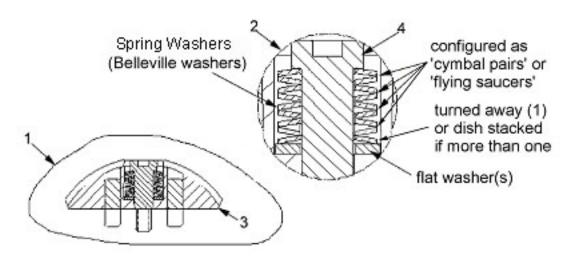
Some configuration of clutch spring stack. Each 'spring' stack contains multiple springs (Belleville washers) - arranged into three, four, or five 'flying saucers', or turned away against the flat washer(s). Shown is the 4 ½ stack.
